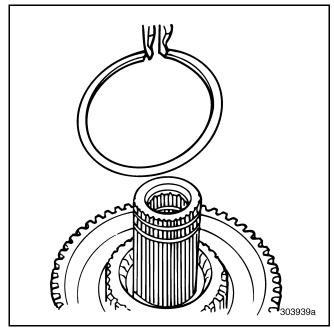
Installing Lo-Range Gear-to-Hub Snap Ring (T313L/T318L Shown)
